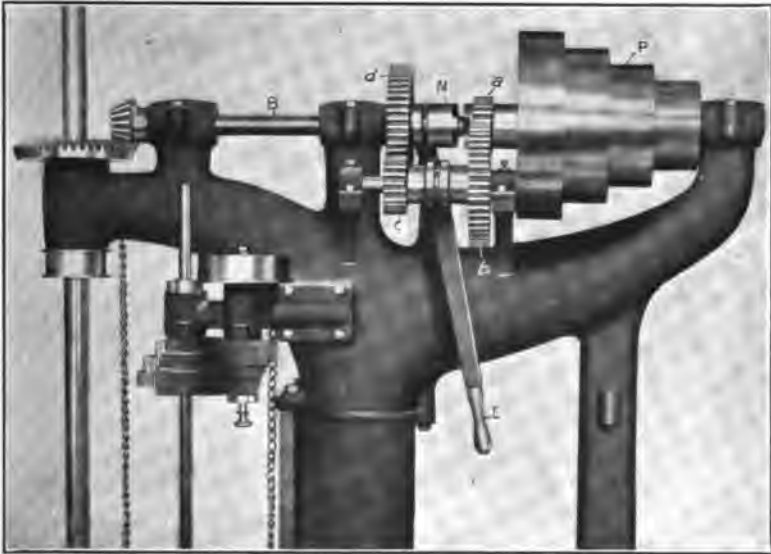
Back-gearing and Feed Change-gears of Upright Drilling Machine
